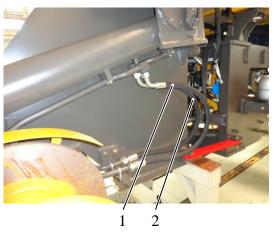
1 Boom cylinder rod-side rubber hose 1 Boom cylinder piston-side rubber hose
